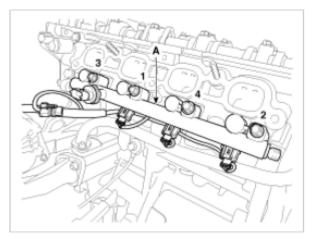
Identifying Injector & Rail Assembly Courtesy of HYUNDAI MOTOR AMERICA
